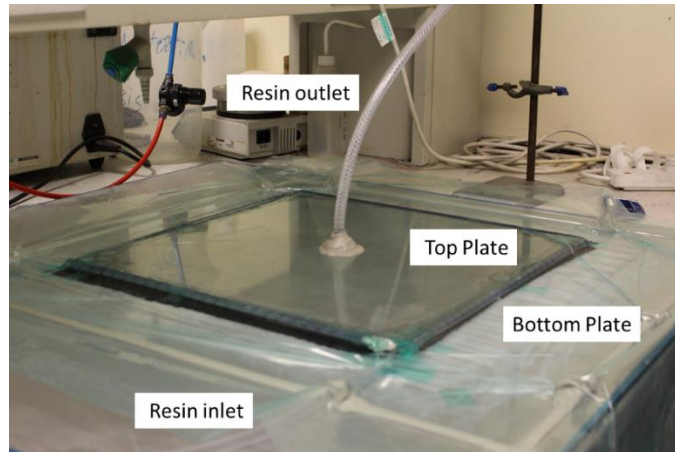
3 Vacuum bag infusion assembly using top and bottom plates.
